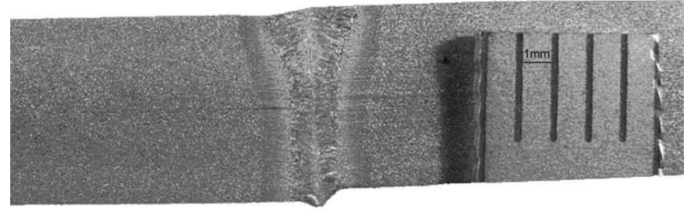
The cross section of Yb:YAG laser butt-welded joint
